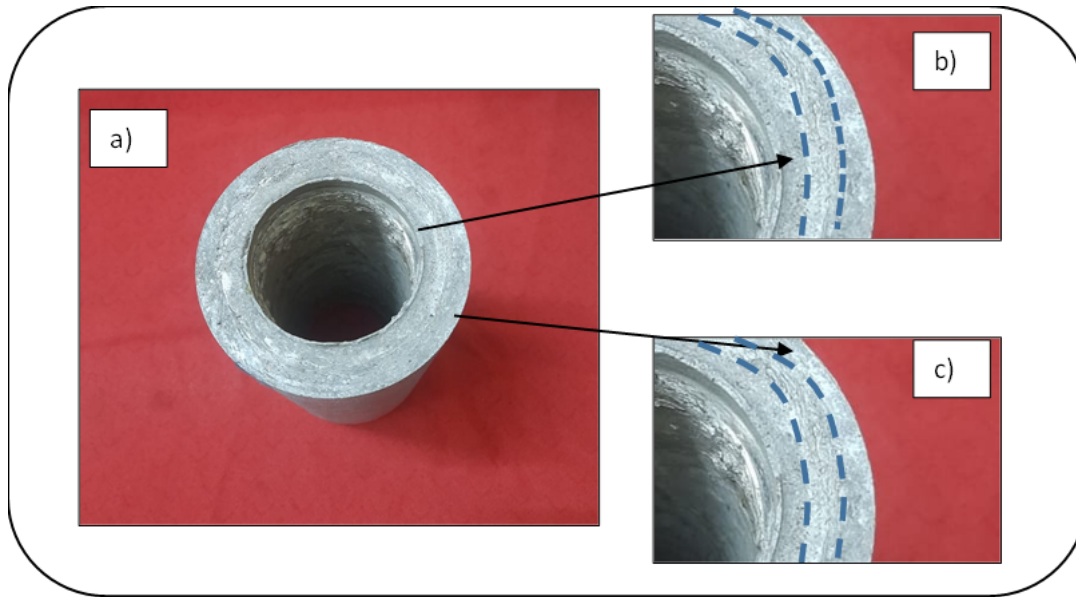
a) FGM fabricated component, b) Inner layer, c) outer layer
